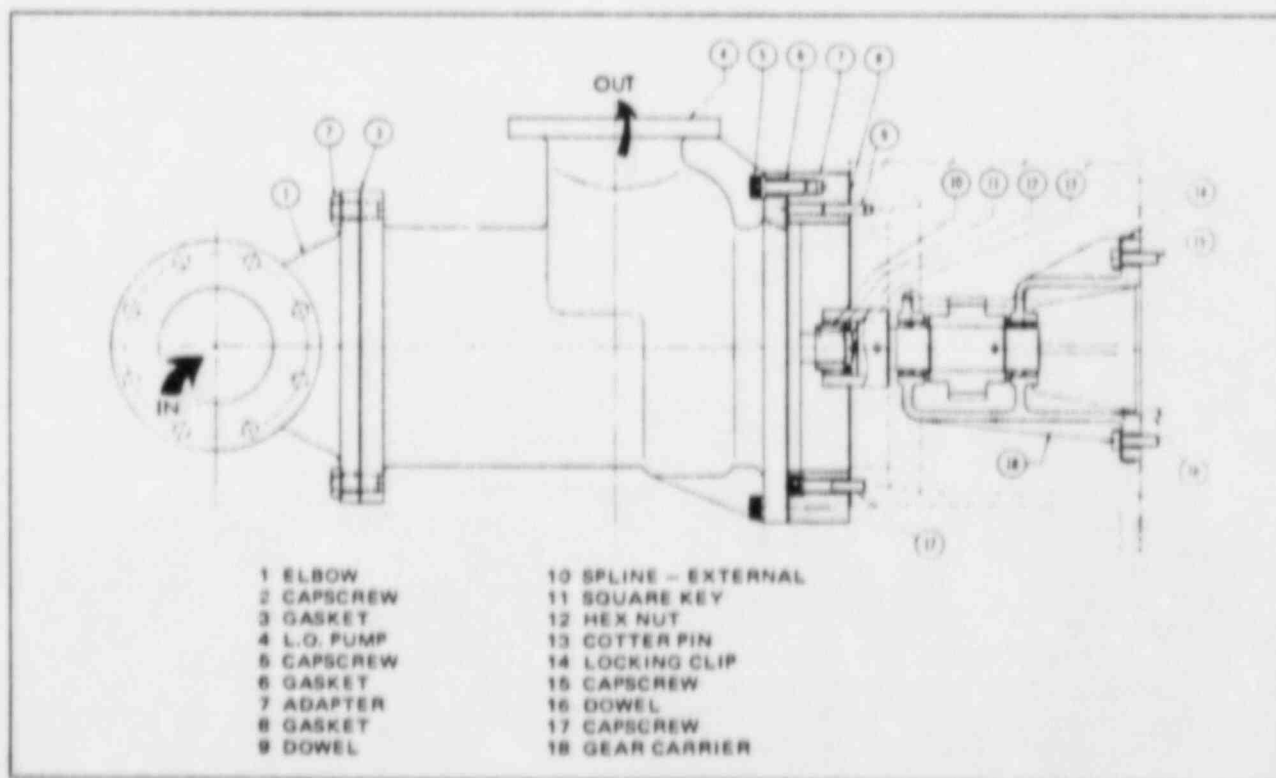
K-1. Lubricating Oil Pump and Gear Carrier Assembly
